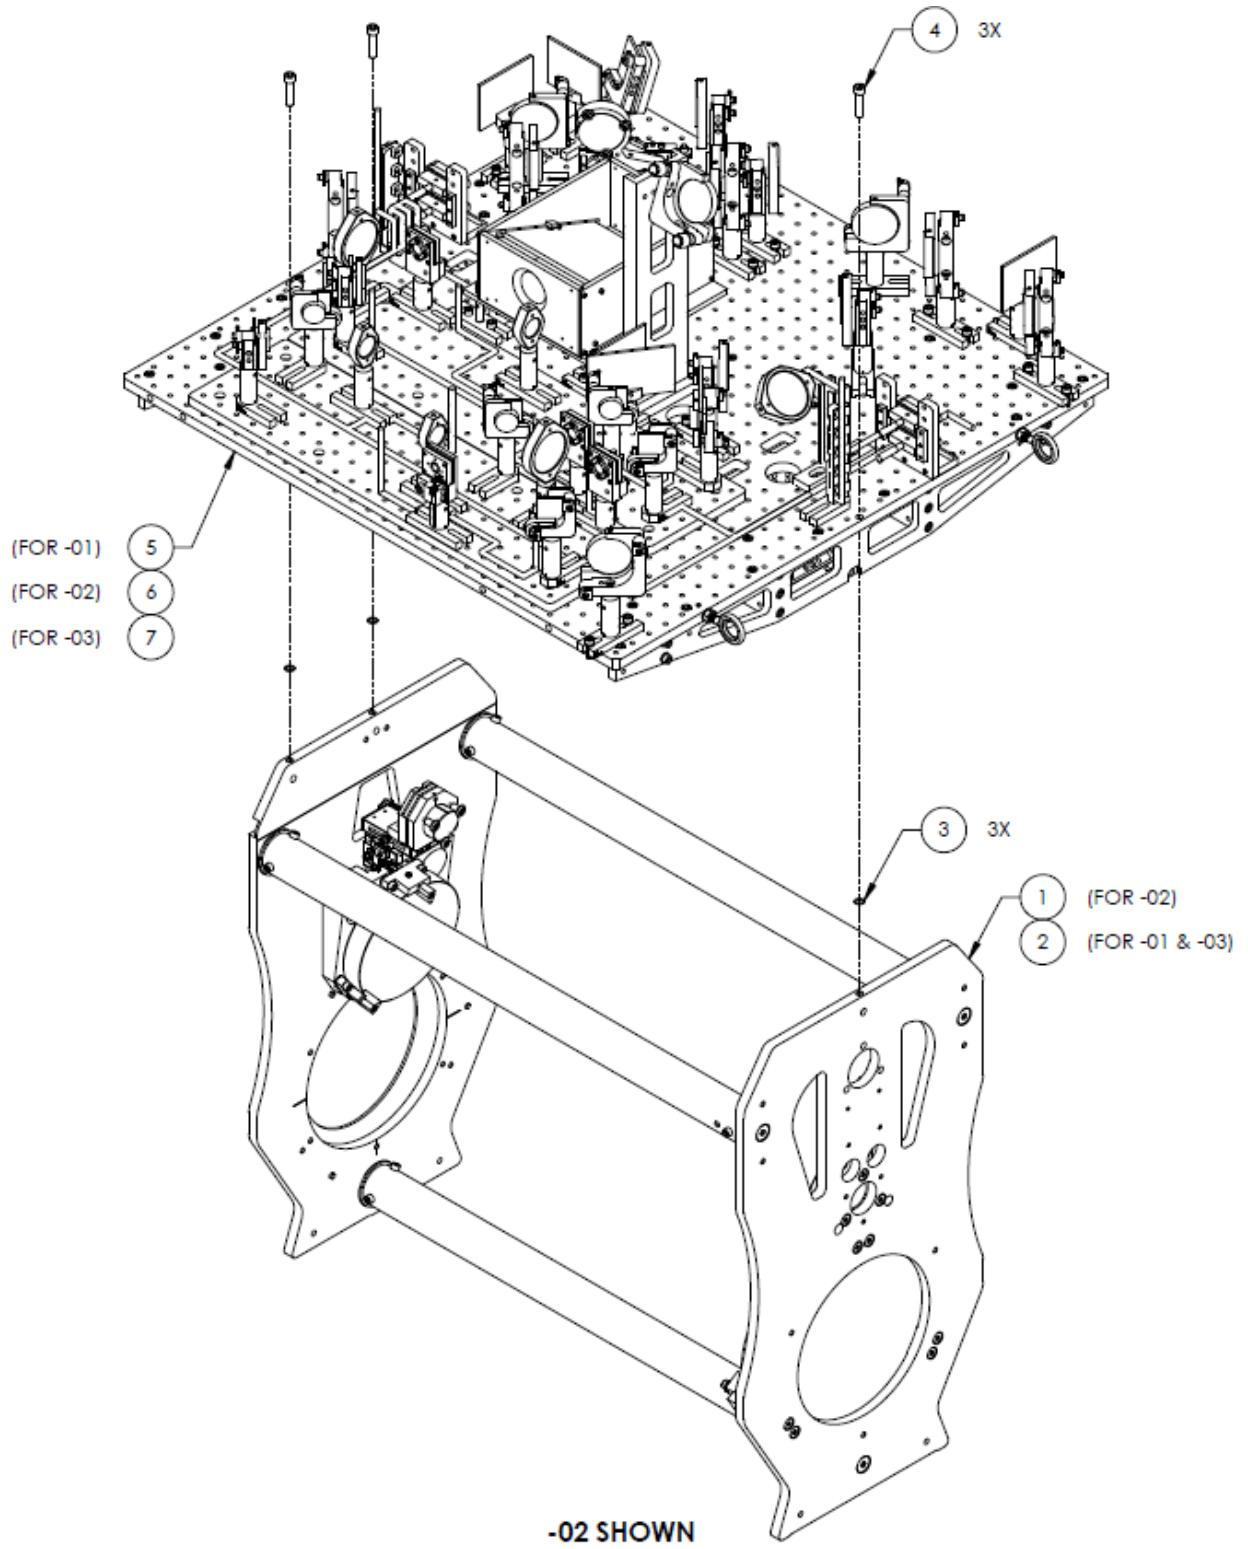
ISC Table Assembly being mounted to Top of the TMS Telescope
